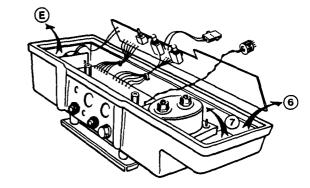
METER, BUZZER AND CIRCUIT BOARD REMOVAL / REPLACEMENT
